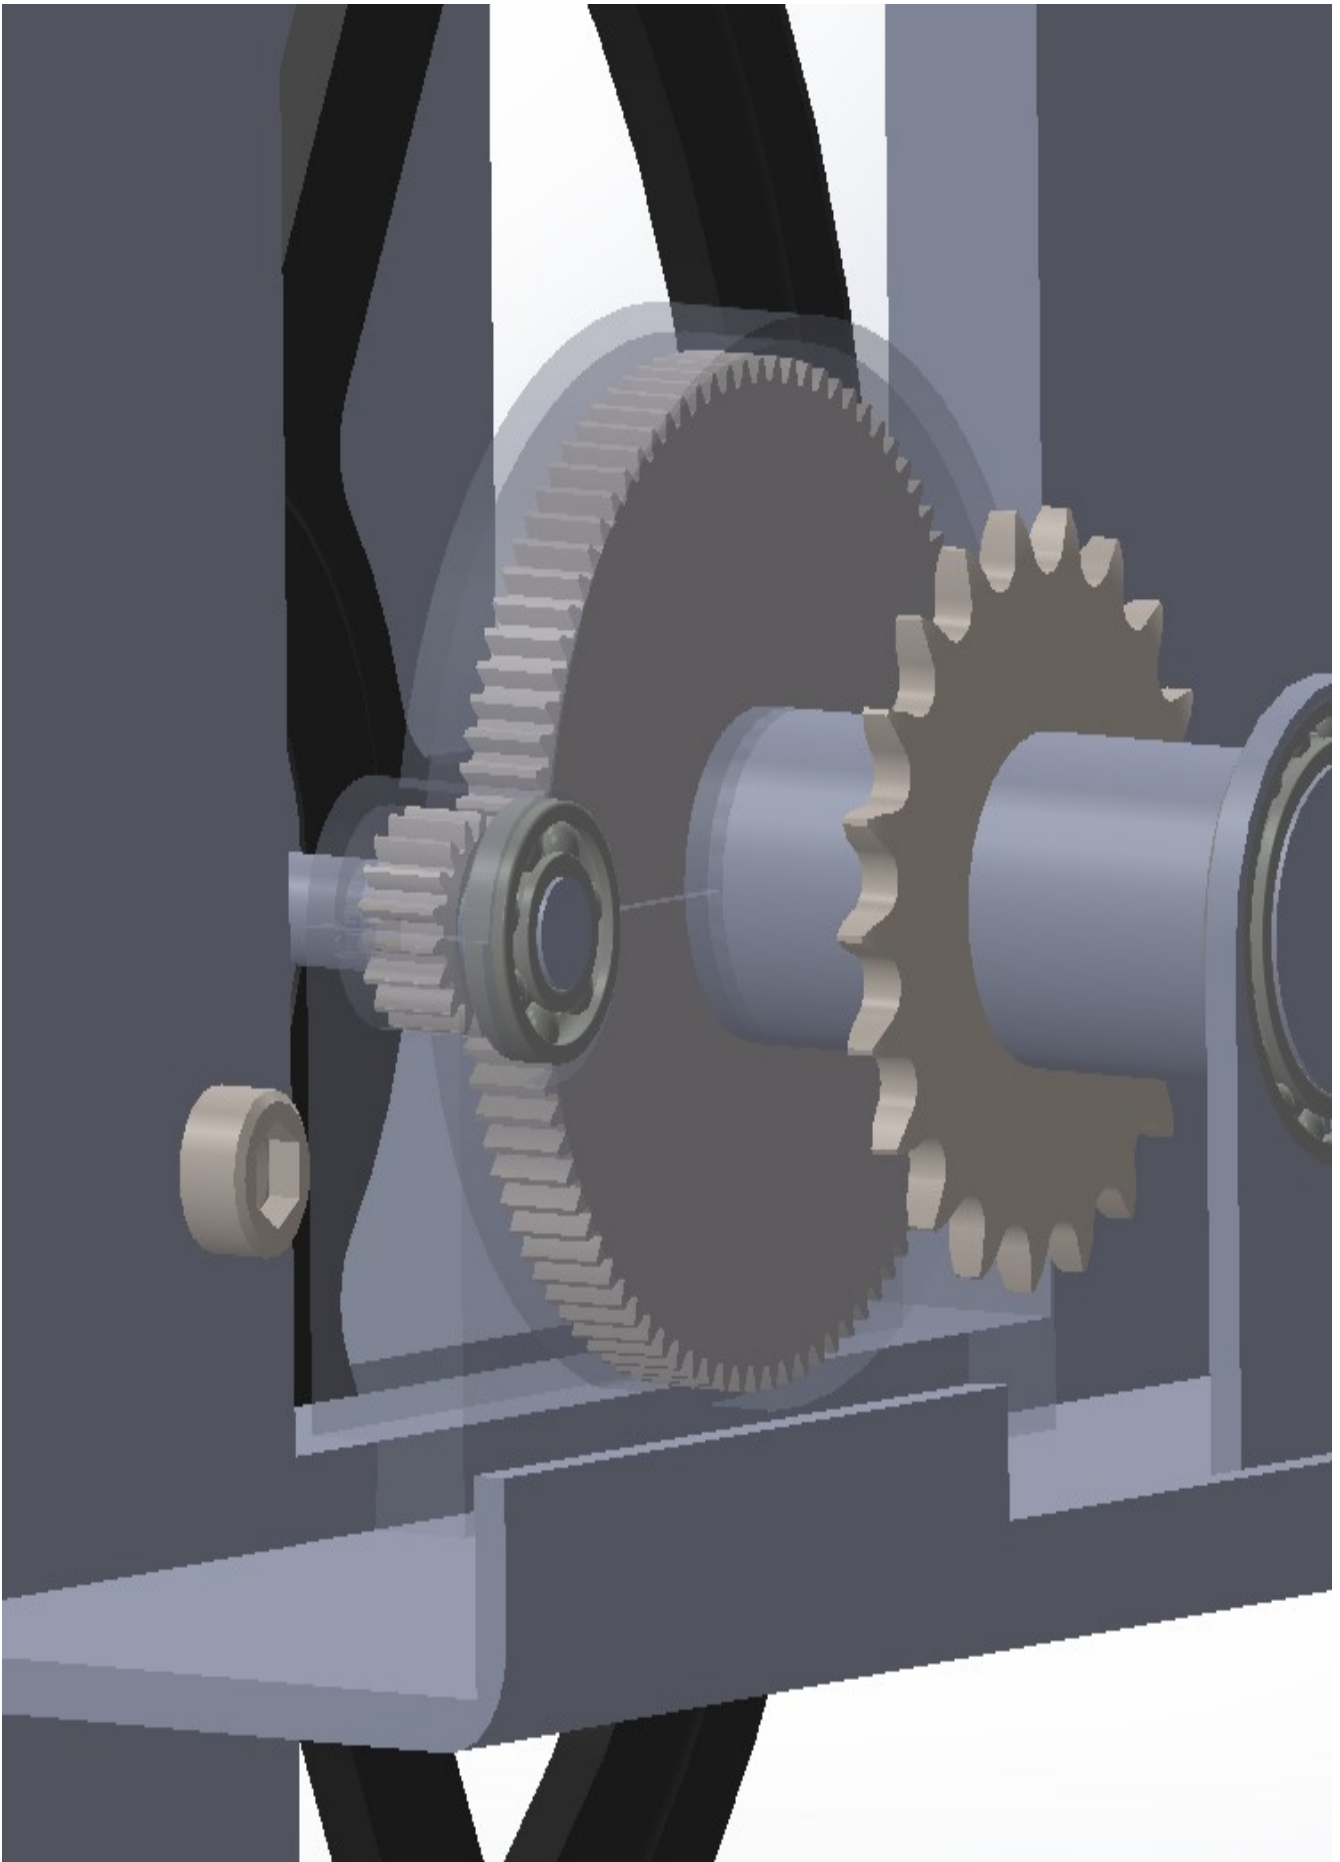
Gearbox (Hidden Under C-Clamp and Sprocket so That It is Away from Machine Edges)
